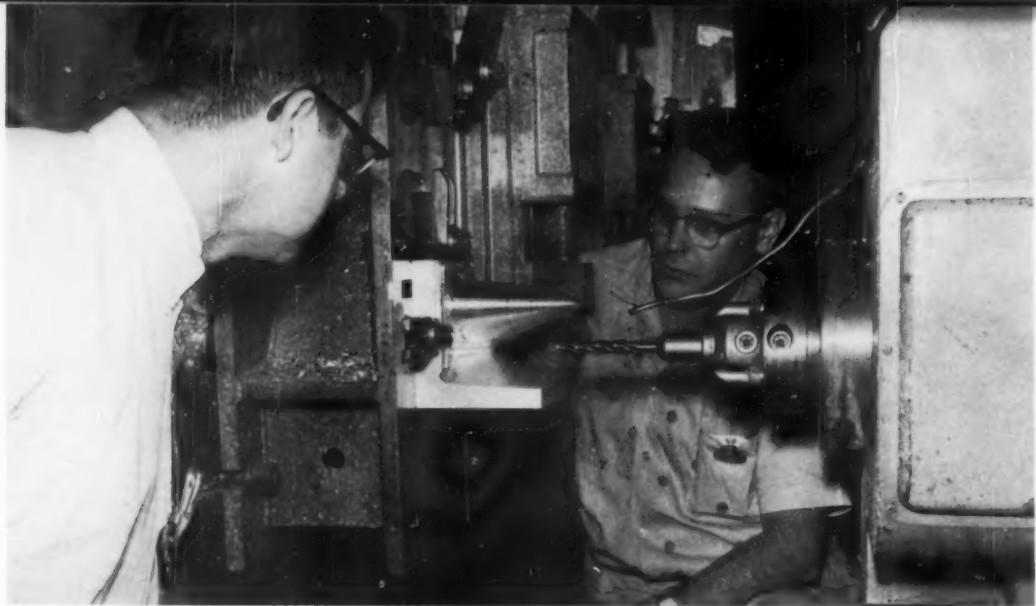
Checking a tape-controlled machine reproduction of a third-degree formula.
